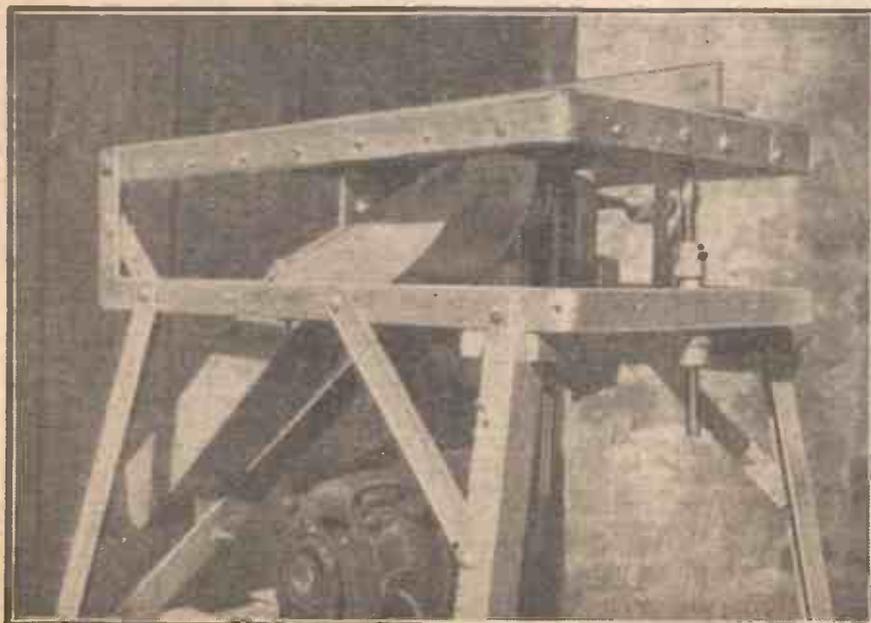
A view of the completed bench showing a duct for removing sawdust.
